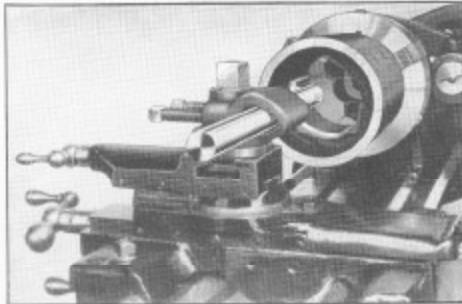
Boring field poles of generator in a back-geared, screw cutting lathe.
